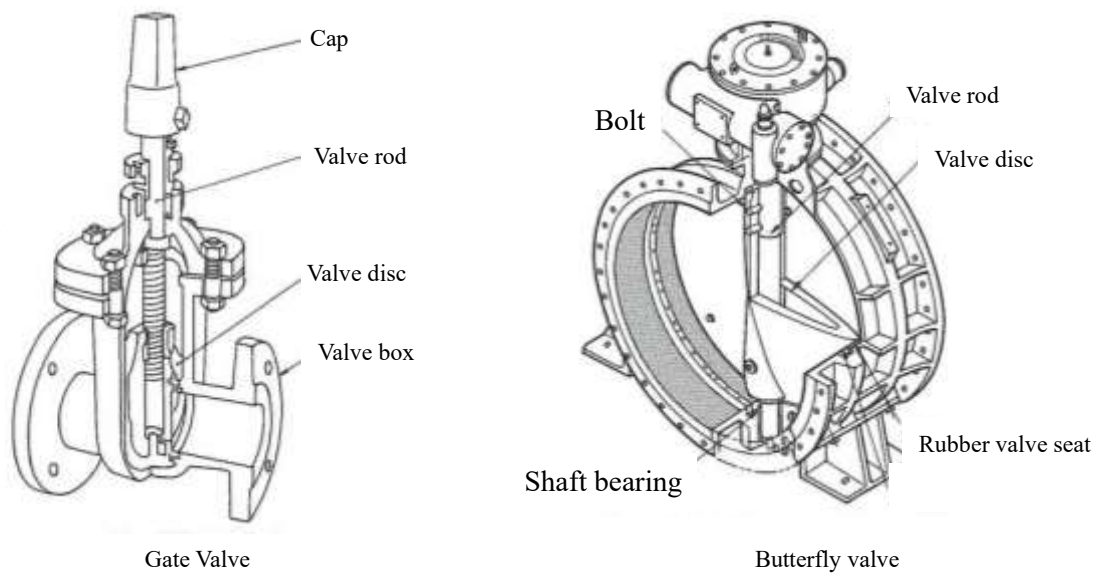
Structure of Gate Valve and Butterfly Valve
